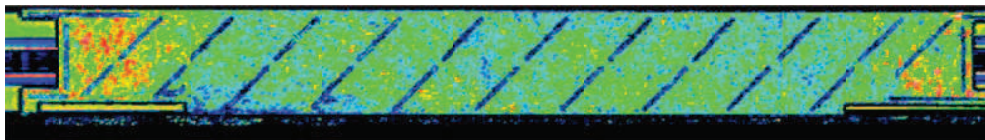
C-scan of the joint with inclined grooves of the ultrasonic inspection with through transmission technique
